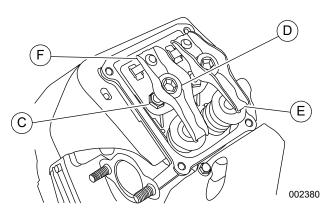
Valve Clearance Adjustment (20–22 kW)
